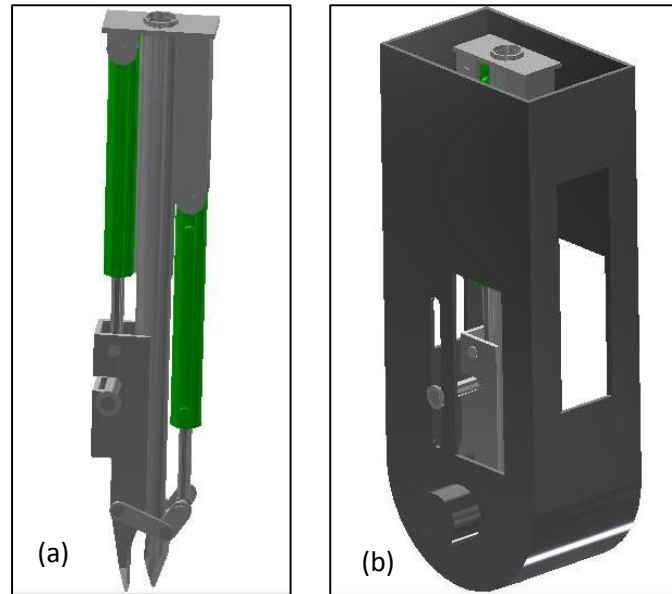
Final CAD rendering (a) dibble mechanism, (b) dibble mechanism located within casing.
